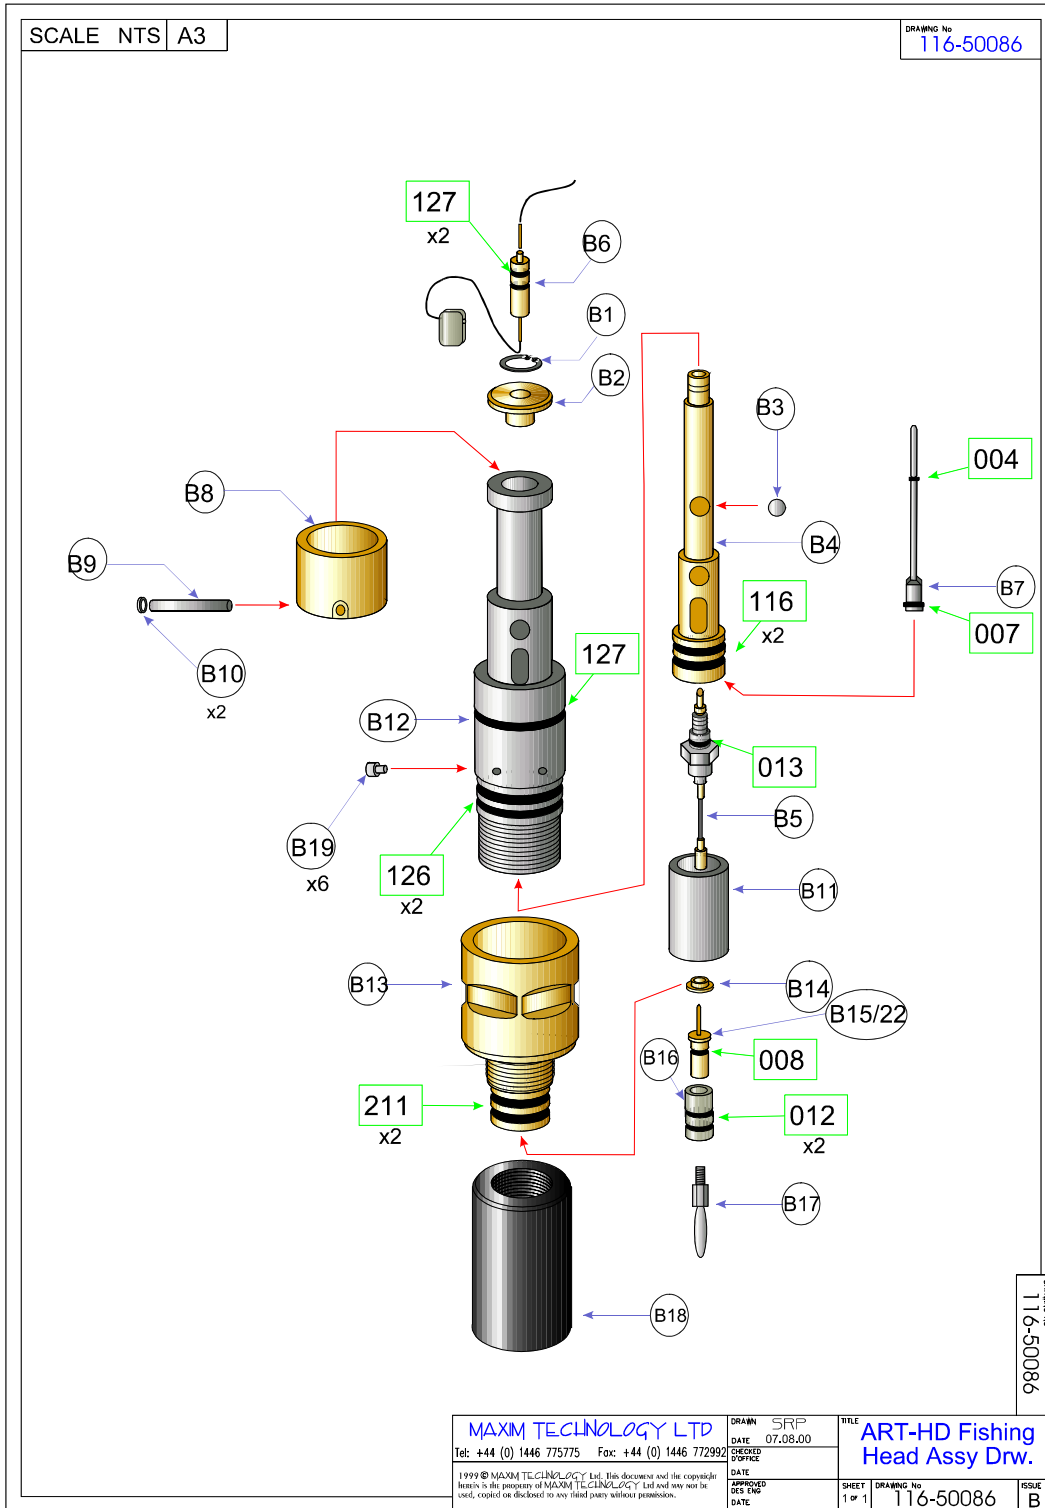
Exploded Assembly Drawing, Fishing Head, ART-H – 116-50086-B
